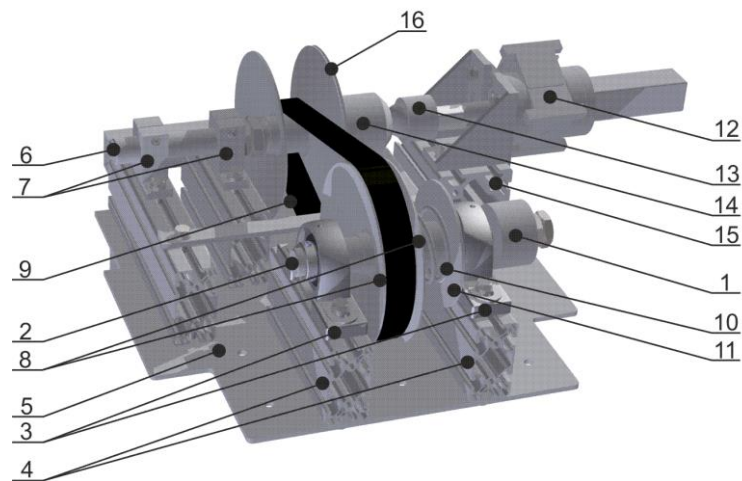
Isometric view of the CVT. Parts presented in the scheme: 1 - Gear, 2 - drive shaft, 3 - Bearing units, 4 - Aluminium profiles, 5 - CVT mounting plate, 6 - Stationary driven shaft, 7 - Shaft supports, 8 - Pulley plates, 9 - Belt, 10 - Spring, 11 - Spring retainer plate, 12 - Screw mechanism, 13 - Ball transfer unit, 14 - Brass sleeve, 15 - Control system base, 16 - Flywheel.
